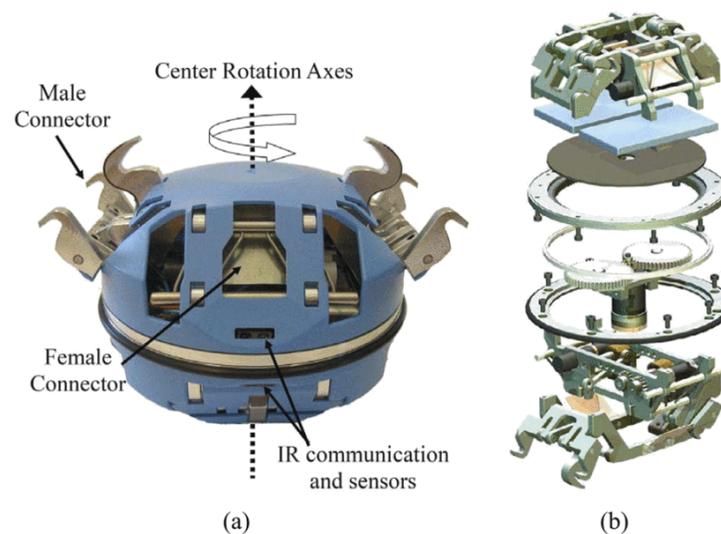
The ATRON self-reconfigurable robotic module and its exploded mechanical assembly.
